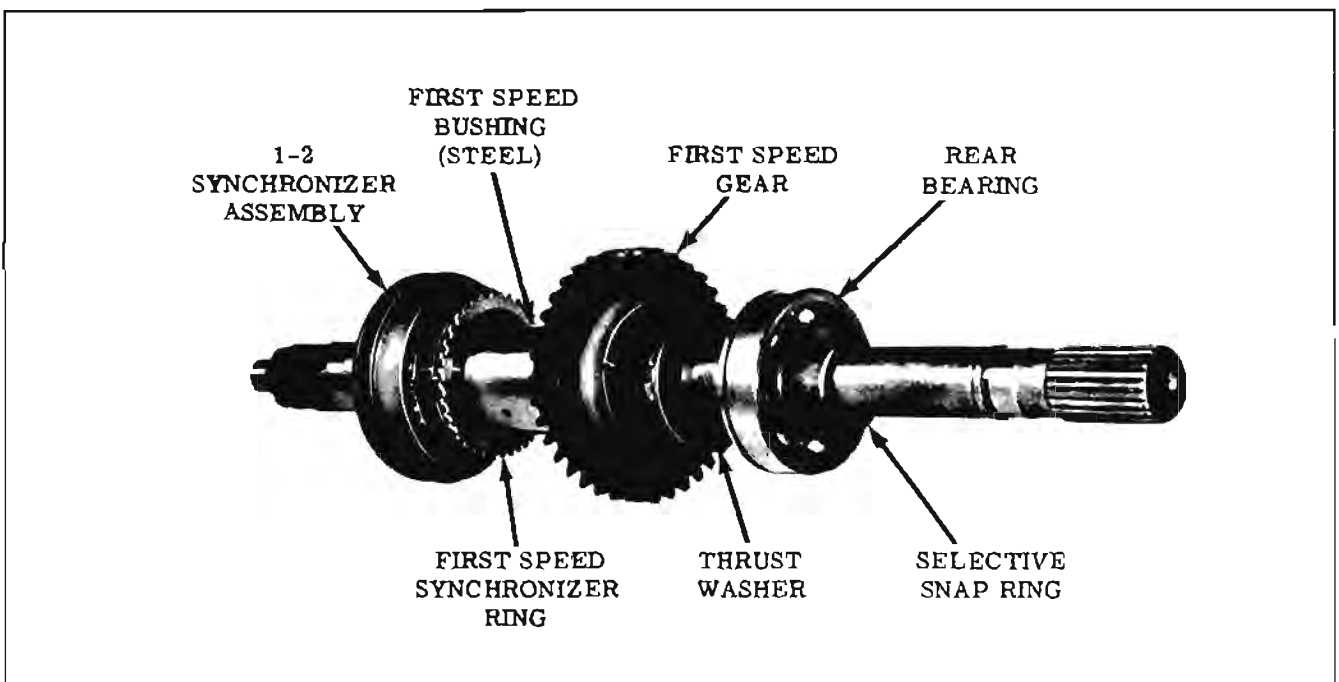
Positioning First Speed Gear and Rear Bearing on Mainshaft
